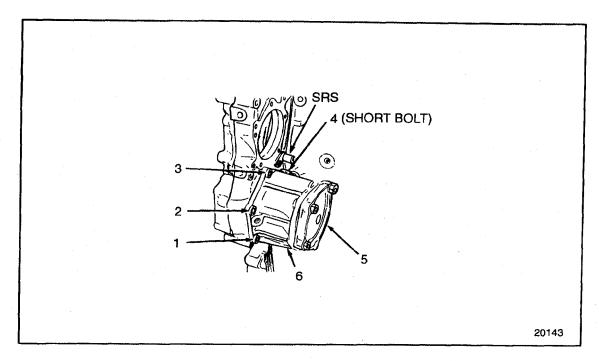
Gear Case Cover Bolt Arrangement (Left Rear)
